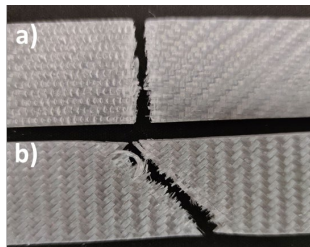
Fractured samples after tensile test of a) 0/90, and b) -45/+45 samples.
